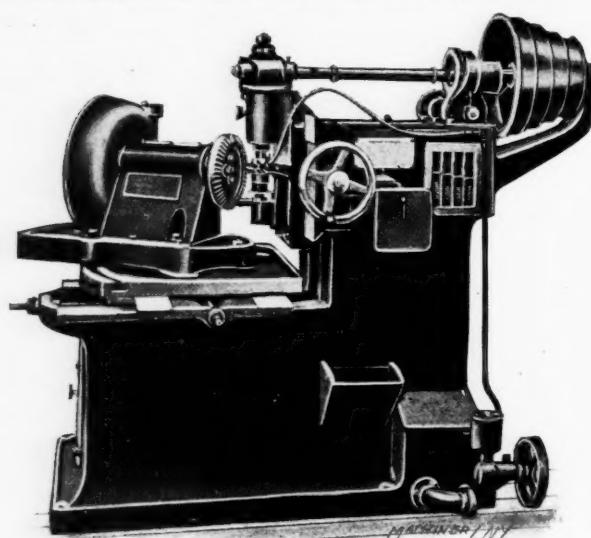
The Chambon Bevel Gear Hobbing Machine as Developed by the Oerlikon Co., particularly adapted for Roughing Bevel Gears Preliminary to Planing.
